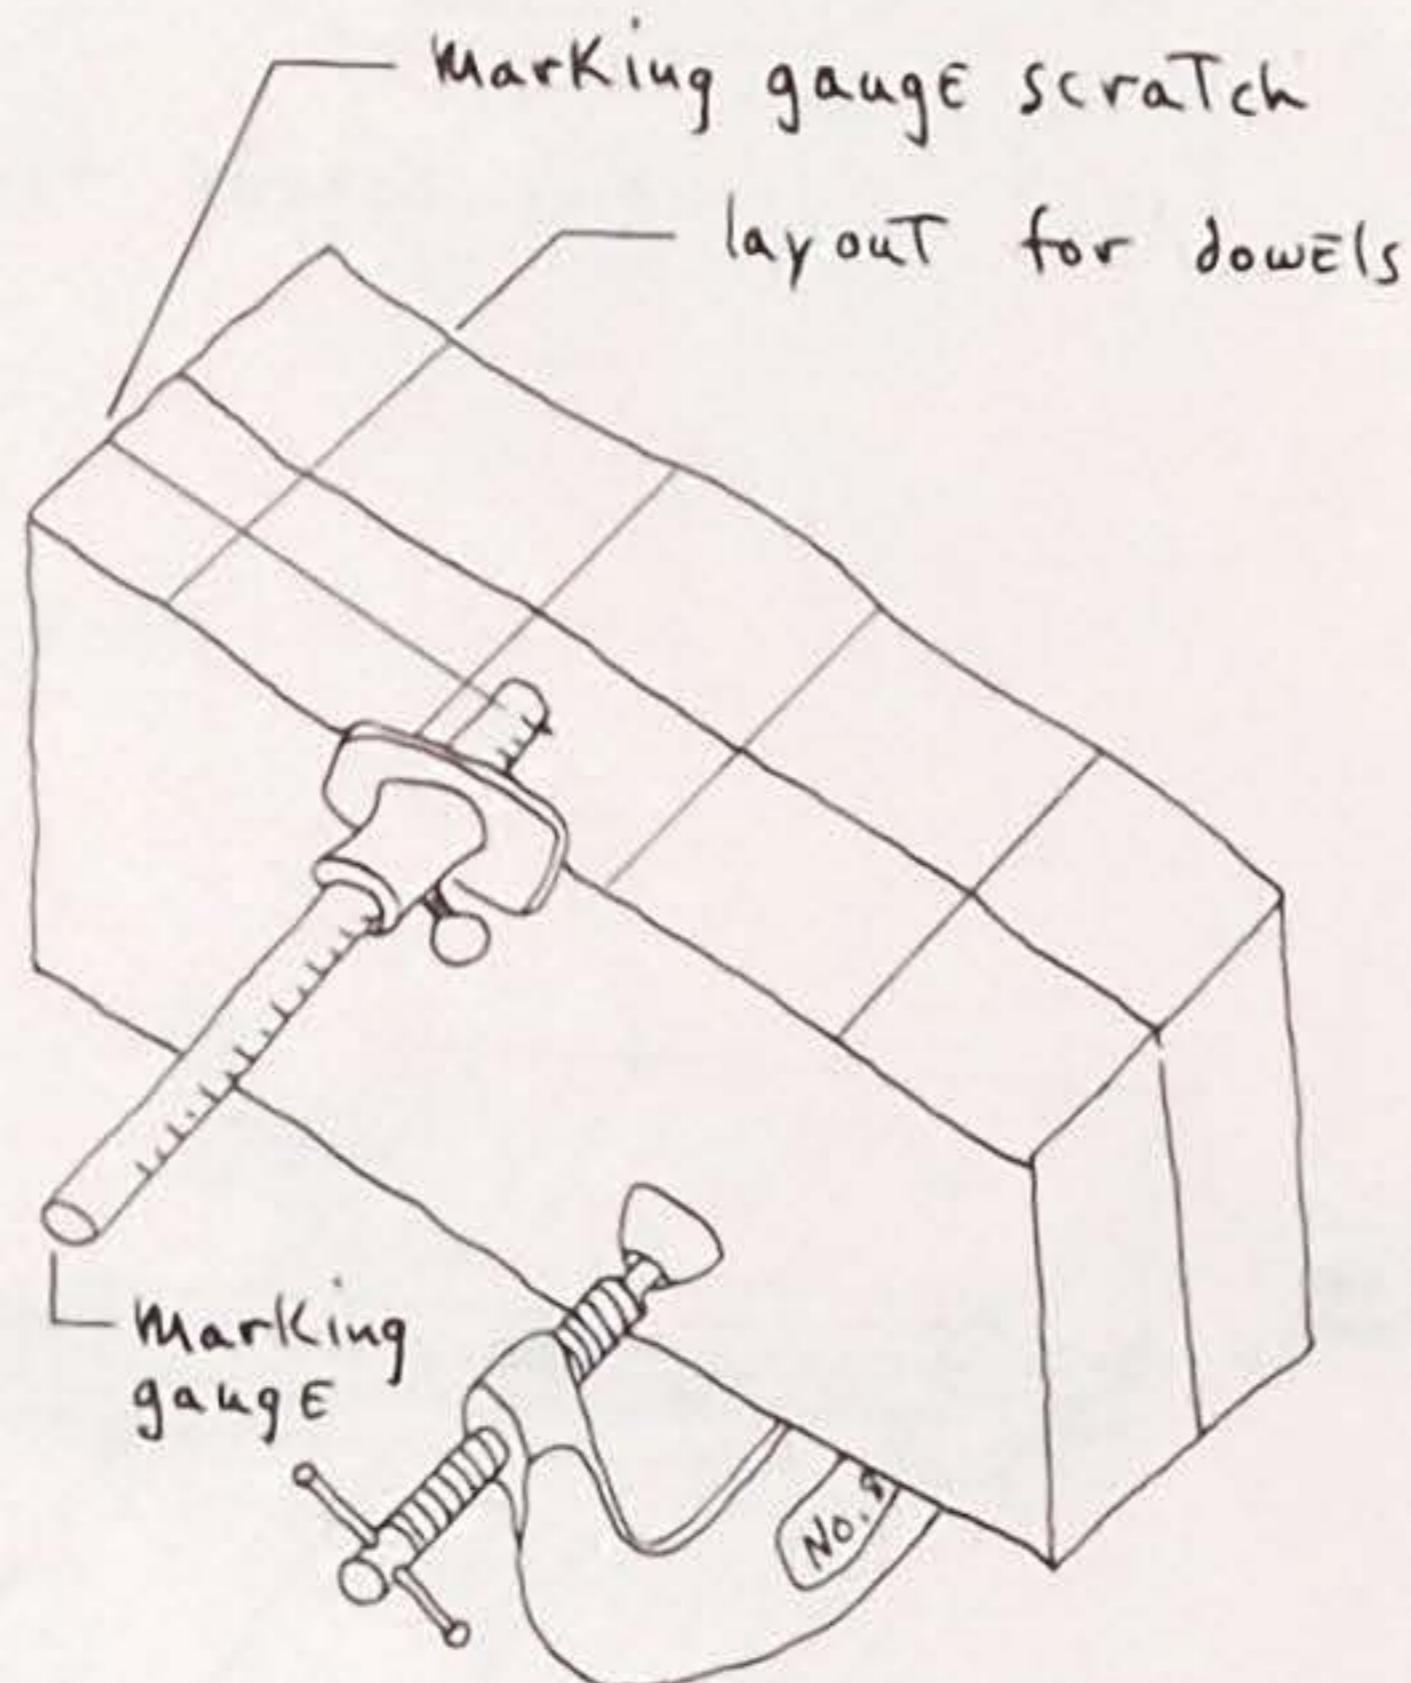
Marking The CENTER of THE Dowel holes with a marking gauge
